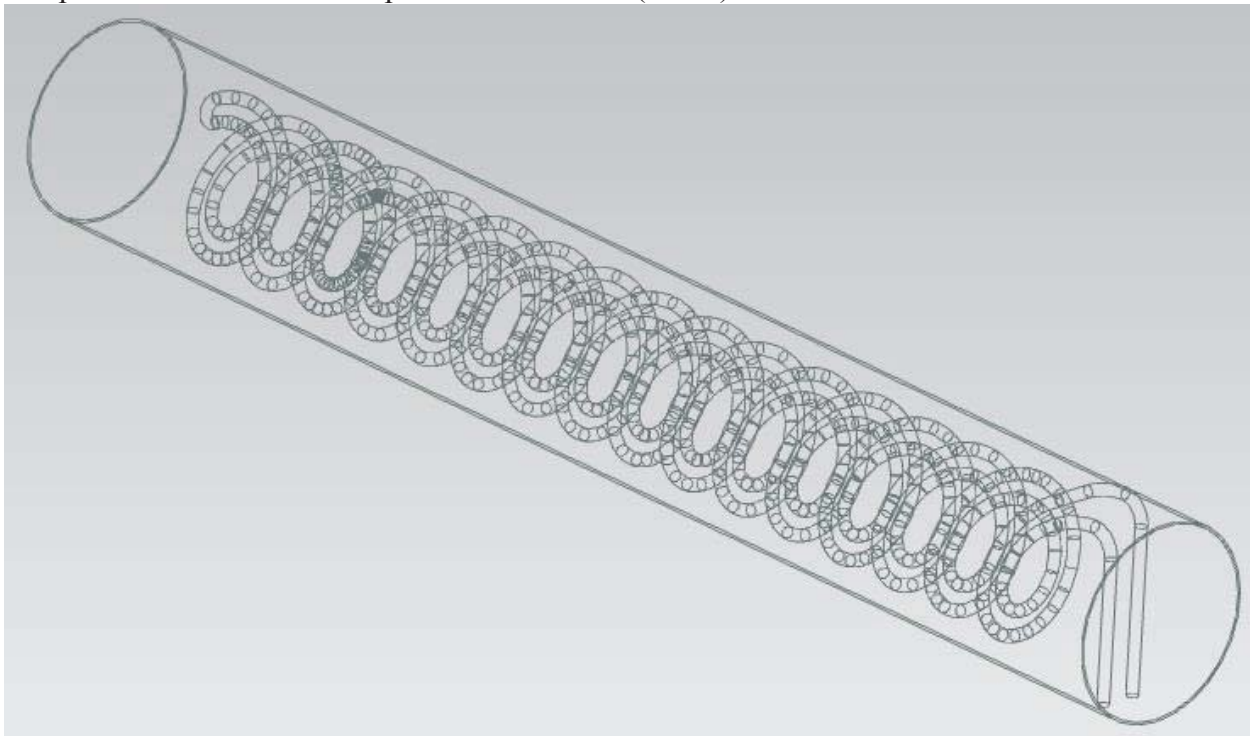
CAD Drawing of a Heat Exchanger to be Used with the MASS
